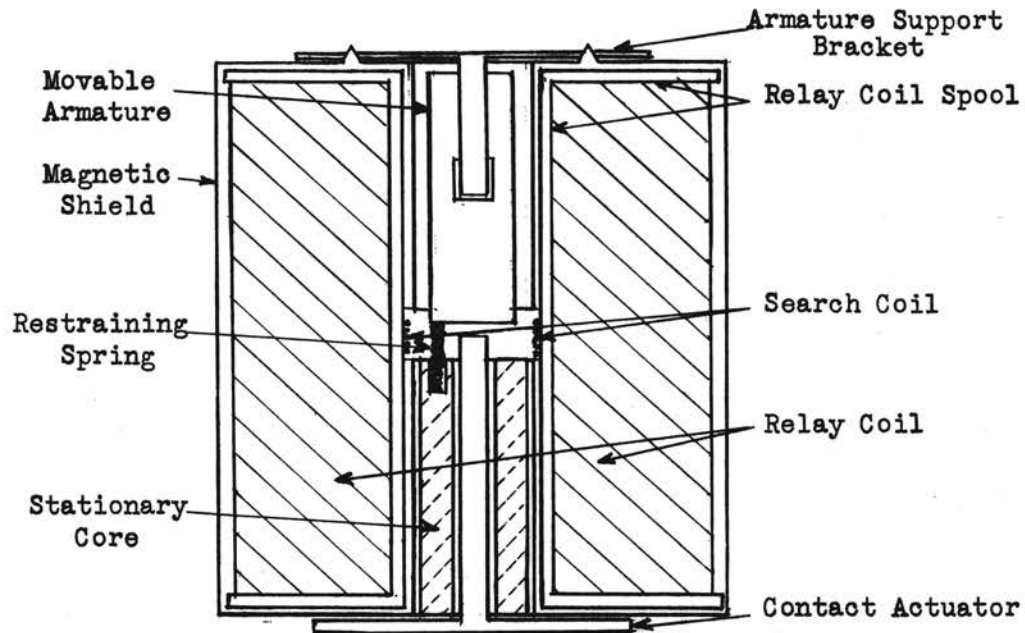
CUT AWAY VIEW SHOWING SEARCH COIL INSTALLED INSIDE THE RELAY AIR GAP
